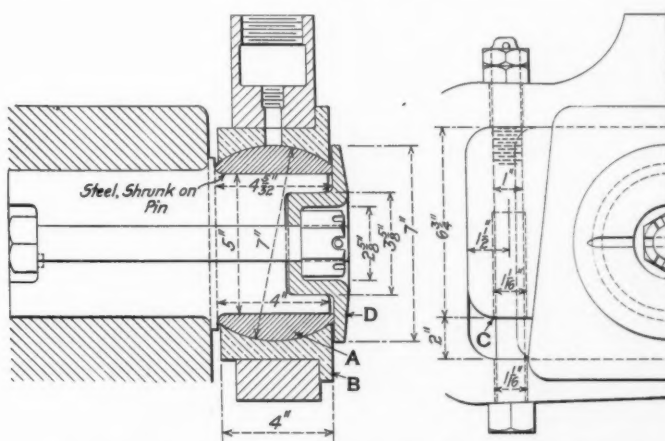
Detail of Ball Bearing Crank Pin and Rod Brass
